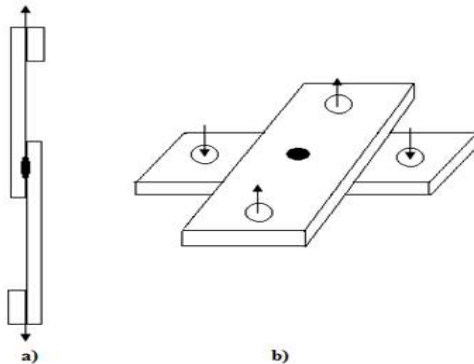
Schematics of a) Tensile shear test samples, b) Cross tension test samples
